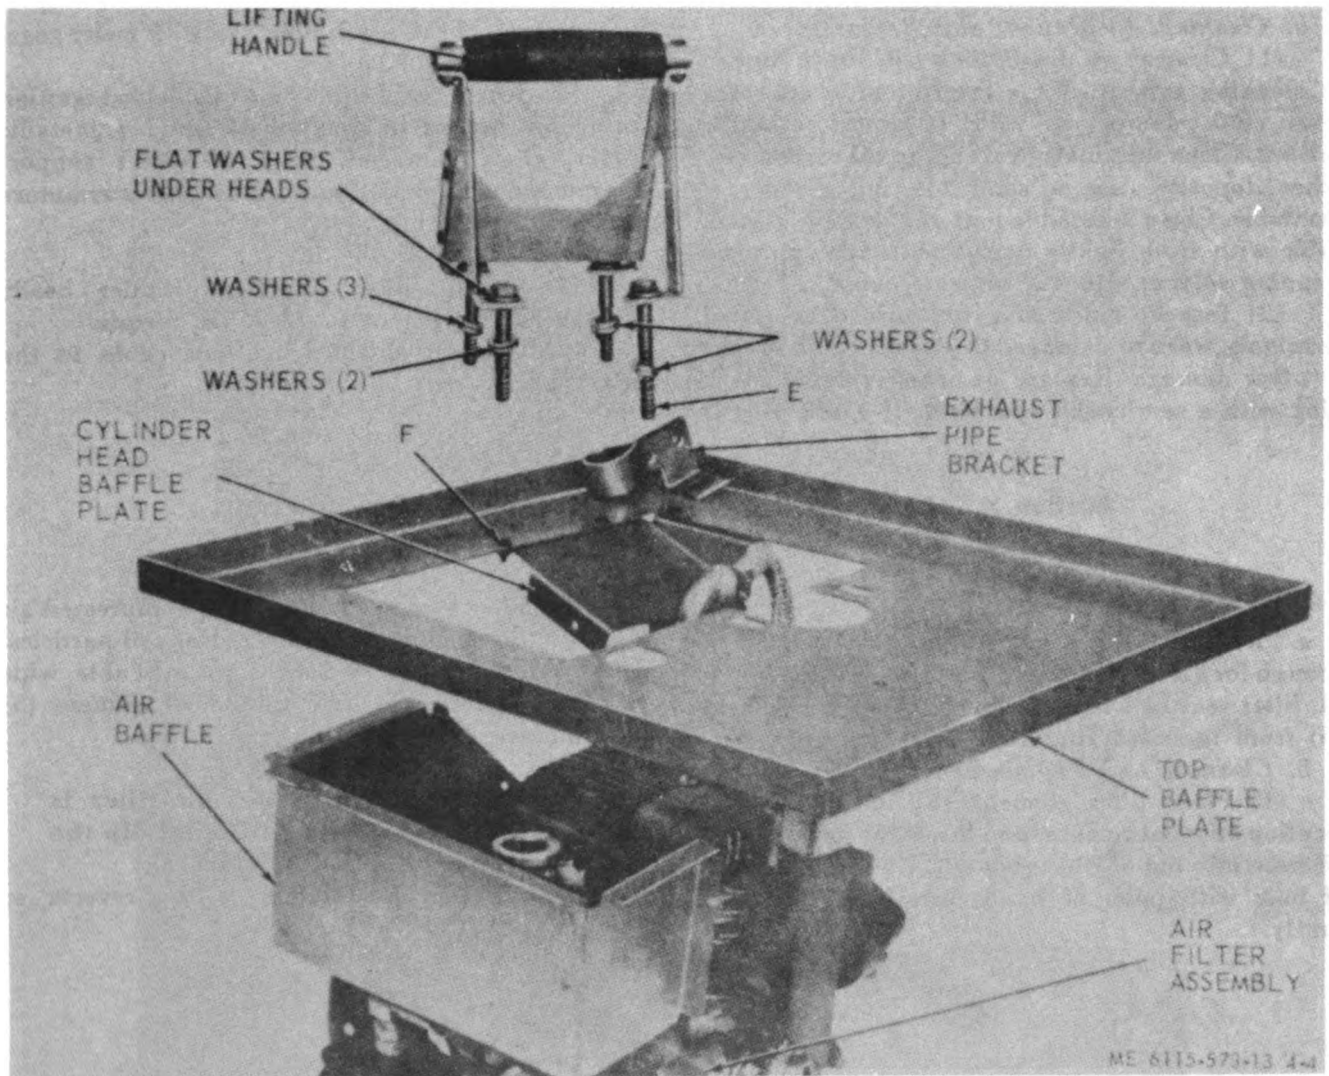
Top baffle plate, cylinder head baffle plate, and lifting handle, removal and installation.
